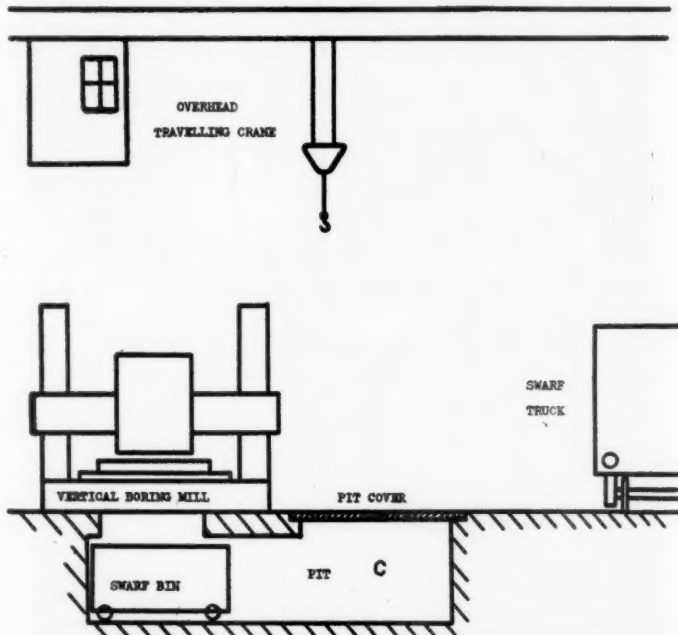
Swarf disposal scheme for large boring mills machining locomotive tyres.
